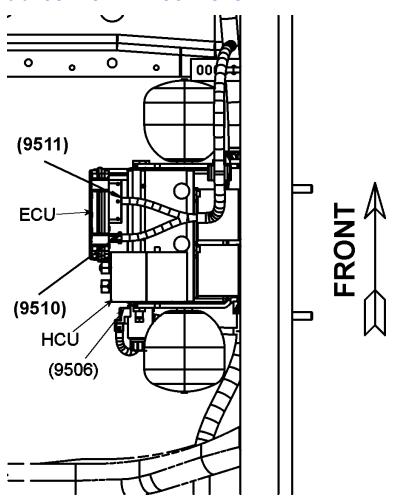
Hydraulic ABS Wiring (Viewed from Underneath)
